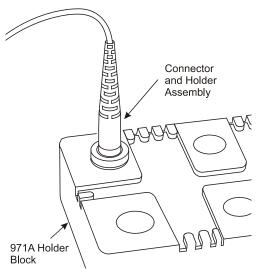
Place Connector and Holder Assembly into 971A Holder Block
